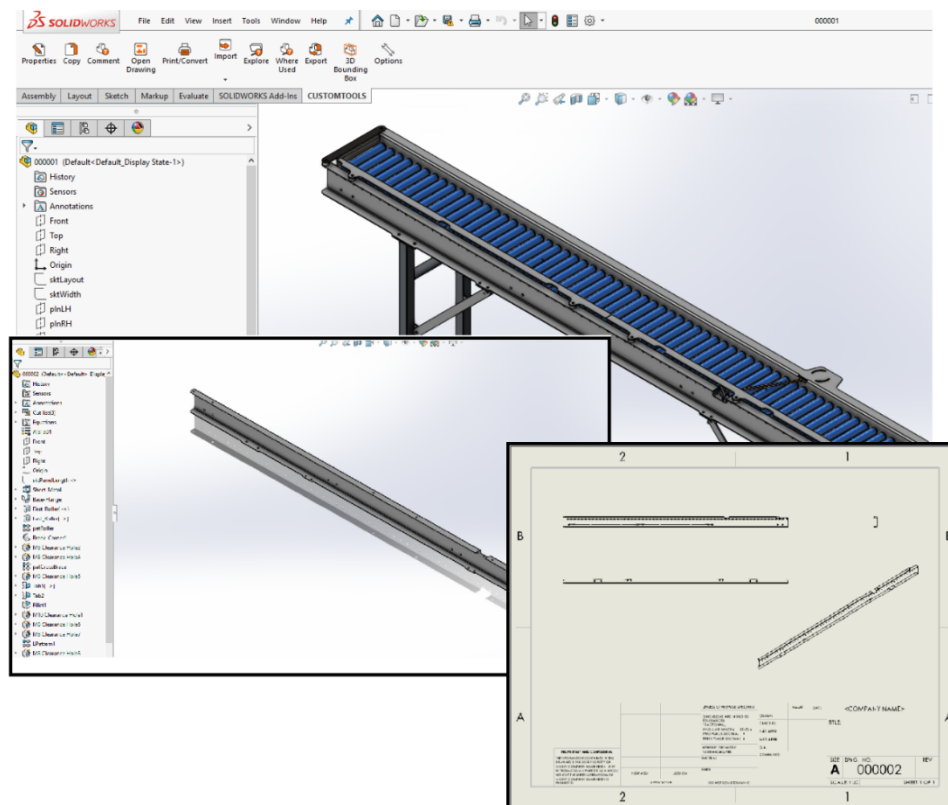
SOLIDWORKS Assembly, Part and Drawing
